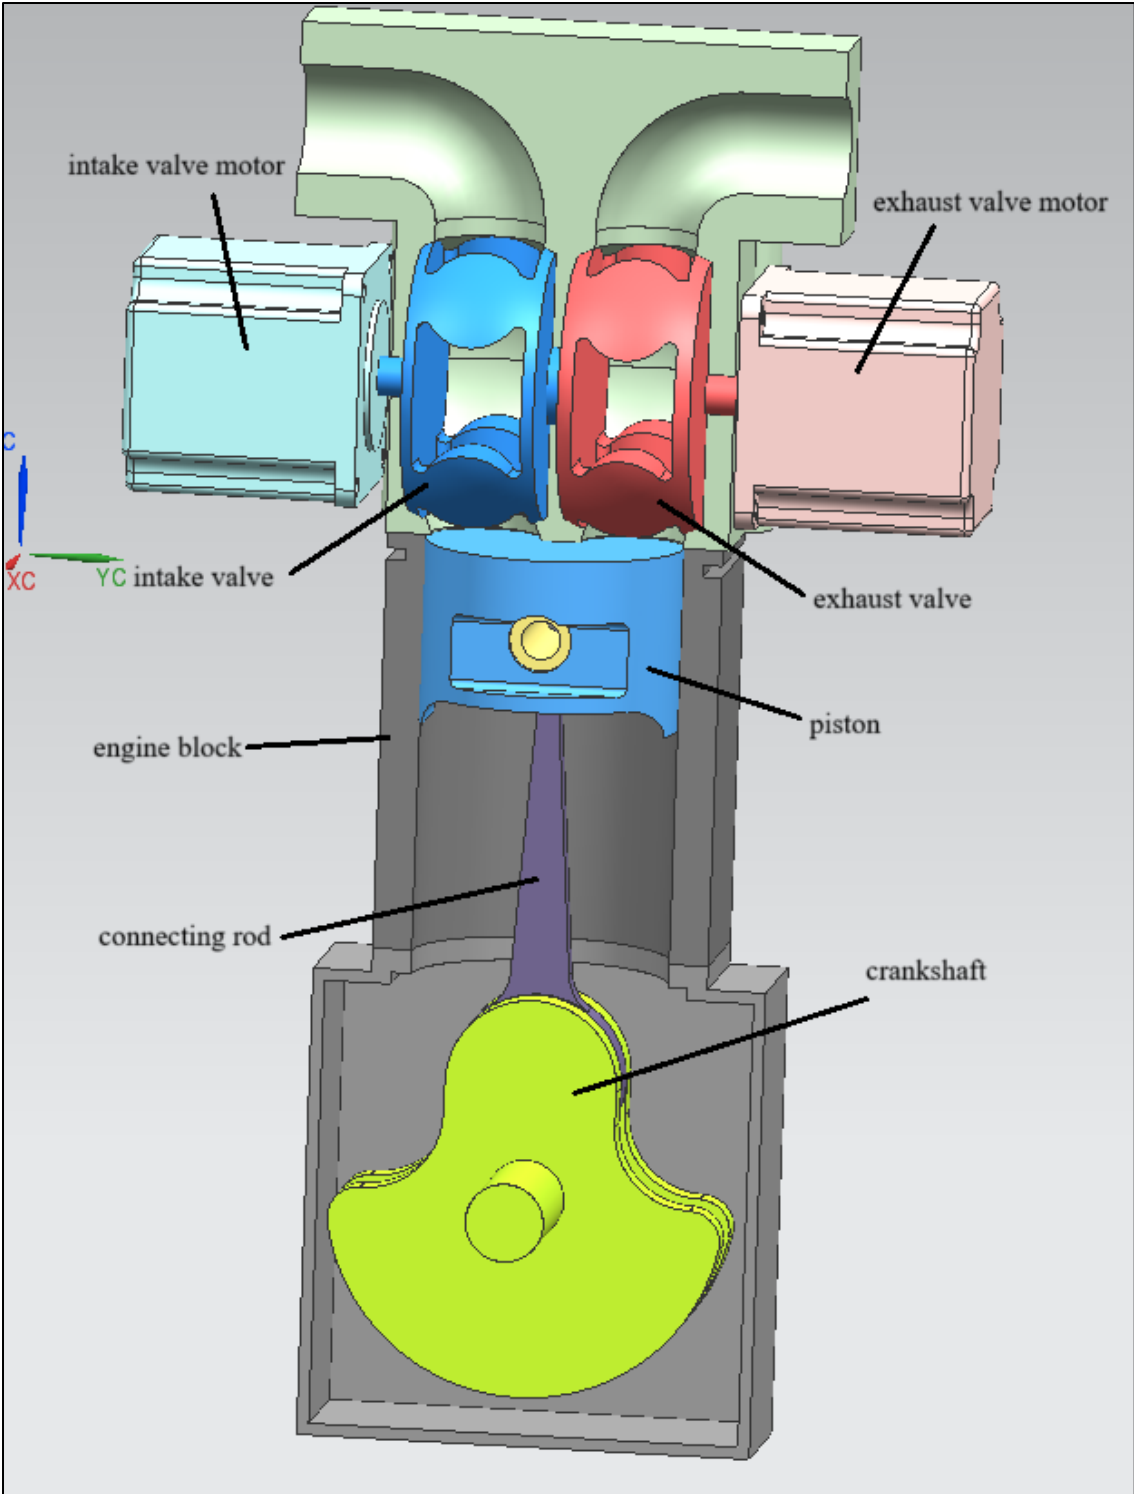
Cross Section of the New Improved Rotary Valve Layout
